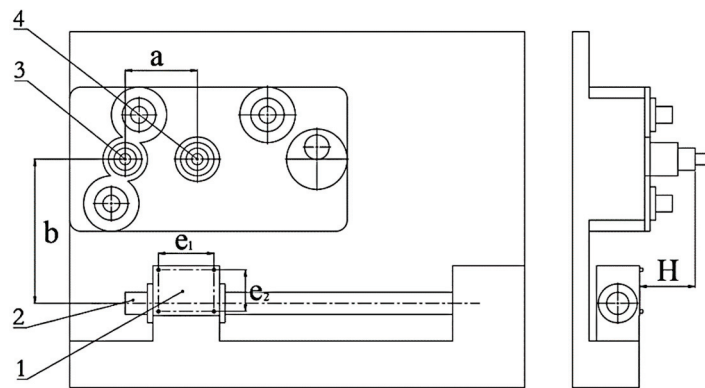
The schematic diagram of the installation position of the hanging wheel mechanism: 1—cover plate; 2—axial lead screw rail; 3—axial feed handwheel shaft; 4—radial feed handwheel shaft; a—the distance between the two handwheel shafts; b—the height difference between the center of the cover plate and the axial feed handwheel shaft axis; e_1 and e_2 —the distance between the fixed bolt of the cover plate; H—the height difference between the cover plate transverse plane and the handwheel install plane.
